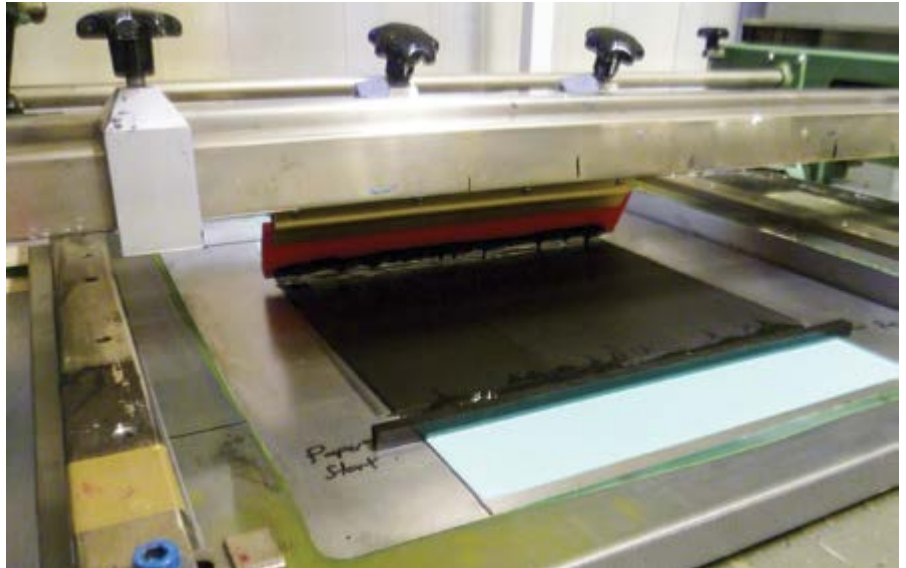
controlled wearing of a squeegee using silicon carbide paper
